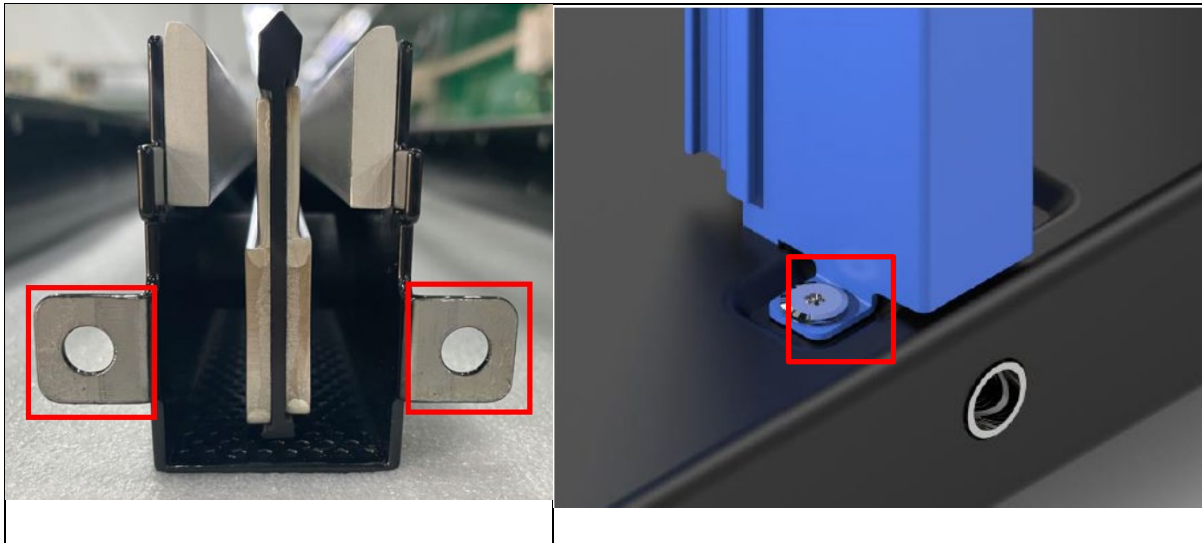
[Left] Bottom of the busbar and masked section. [Right] Busbar mounted onto the rack with bottoms of tabs connecting to the rack
